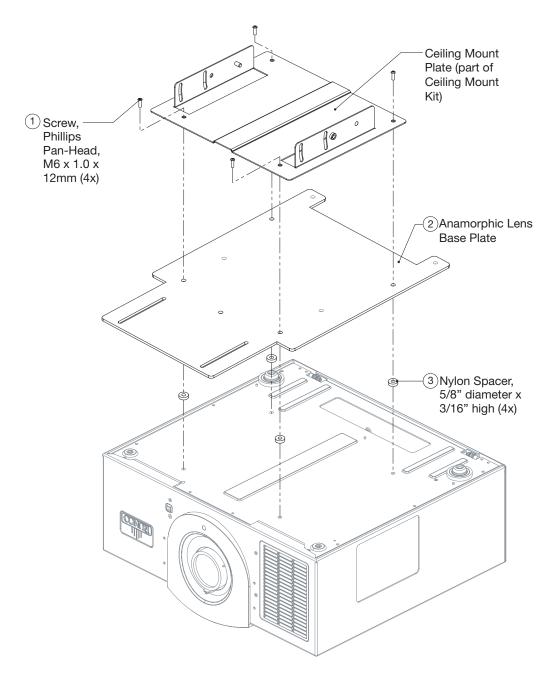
VX-3000i/CineWide or VX-3000d/CineWide with Rainier II/McKinley (Cylindrical) Lens Base Plate and Ceiling Mounting Plate - Exploded View
